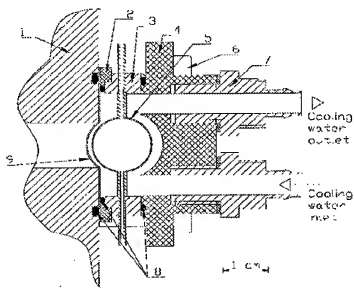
Simplified technical drawing of the target system. (1) collimator (aluminum); (2) spacer (PEEK[®]); (3) holder ring (copper); (4) back plate (PEEK[®]); (5) target-chamber (niobium); (6) bolt (SS 316, M 4); (7) fitting (SS 316, 5 mm i.d.); (8) O-rings (Viton[®]); (9) vacuum window (aluminum, 0.3 mm thickness).
